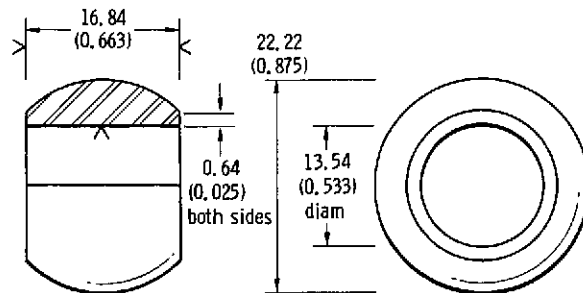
Details of drilled-ball design. (Dimensions are in mm (in.). Surface finish is 0.4 μ m (16 μ in.) where marked by \surd .)
